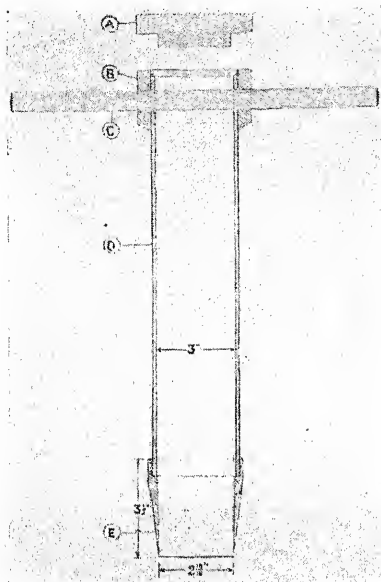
Soil sampling tube. A, steel drive cap; B,  $\frac{1}{2}$  X 2 inch shoulder strap welded to tube; C,  $\frac{3}{4}$  inch removable rod handle; D,  $\frac{3}{4}$  X 3 X 14 inch cold drawn seamless steel tube; E, removable, case-hardened steel bit.
